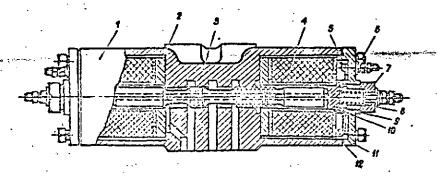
TORQUE CONVERTER LOCK-UP NECHANISM
